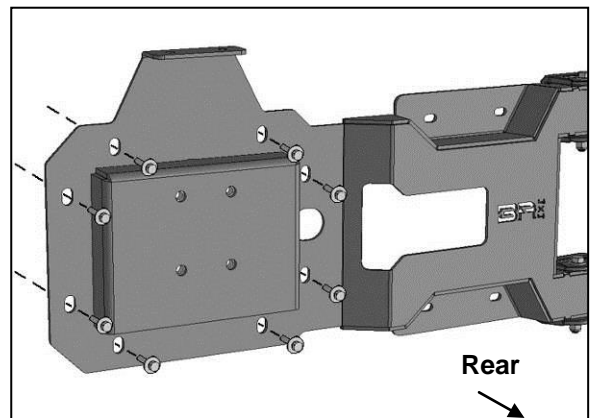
Hinge Bases and Nylon Stop Plates installed. Note Stop Plates must be installed as pictured
